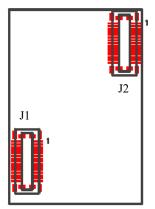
Connector and Pin Number 1 on Board Position (bottom view)
